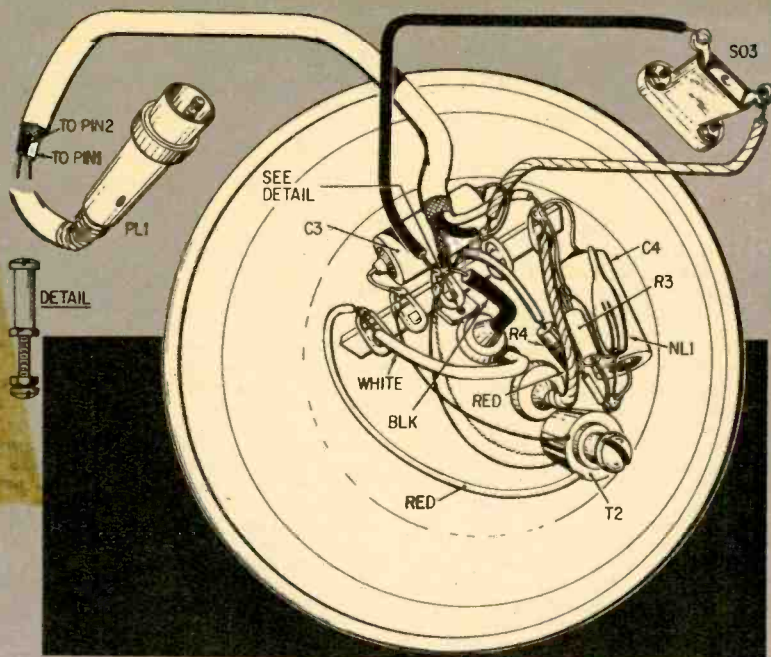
Back of flash head. Reflector is supplied with holes predrilled for red, white and black leads from flashtube and screws that hold terminal strip and T2. Detail sketch at left shows how a 1/4-in. screw is installed through the reflector to hold the terminal strip and the back cover.
